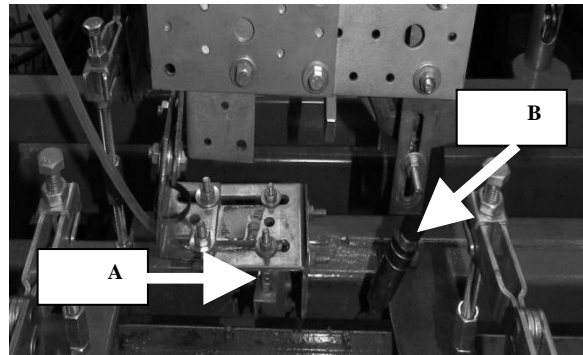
Montage of welding head (B) and micro-jet injector (A).
